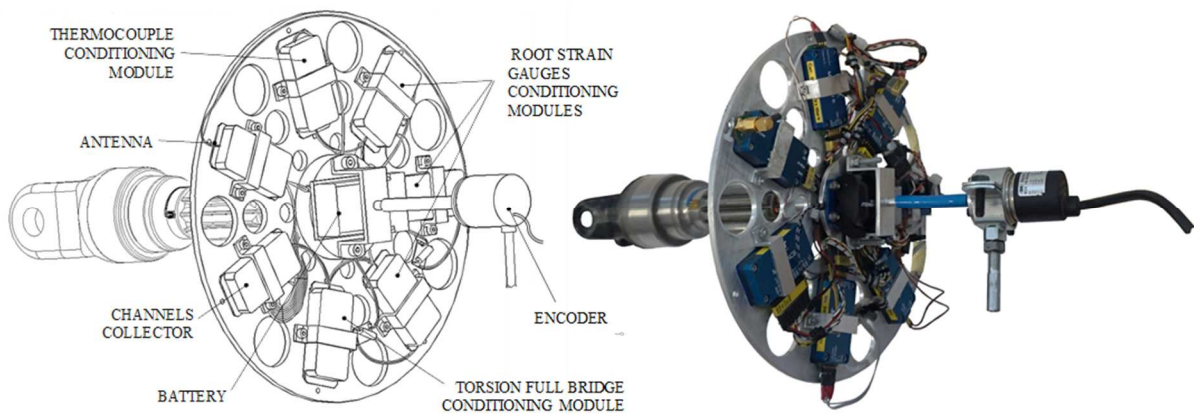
Assembly of the aluminium plate carrying the telemetry modules.
